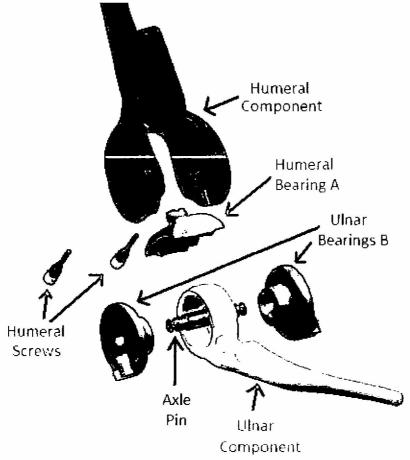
The Zimmer Nexel Total Elbow, exploded view
